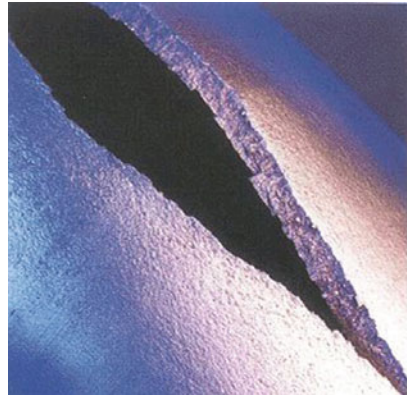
Macroscopic ductile fracture of a tube made of steel
